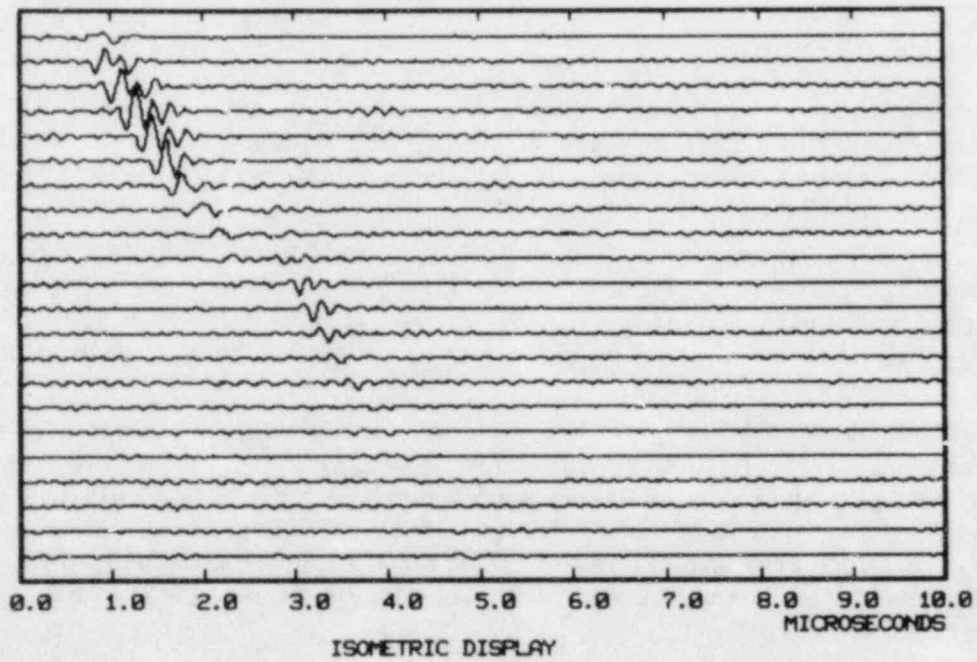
Nominal 0.25-in. Deep Thermal Fatigue Crack Under Three-Wire Submerged Arc Cladding Scanned Perpendicular to the Lay of the Cladding
